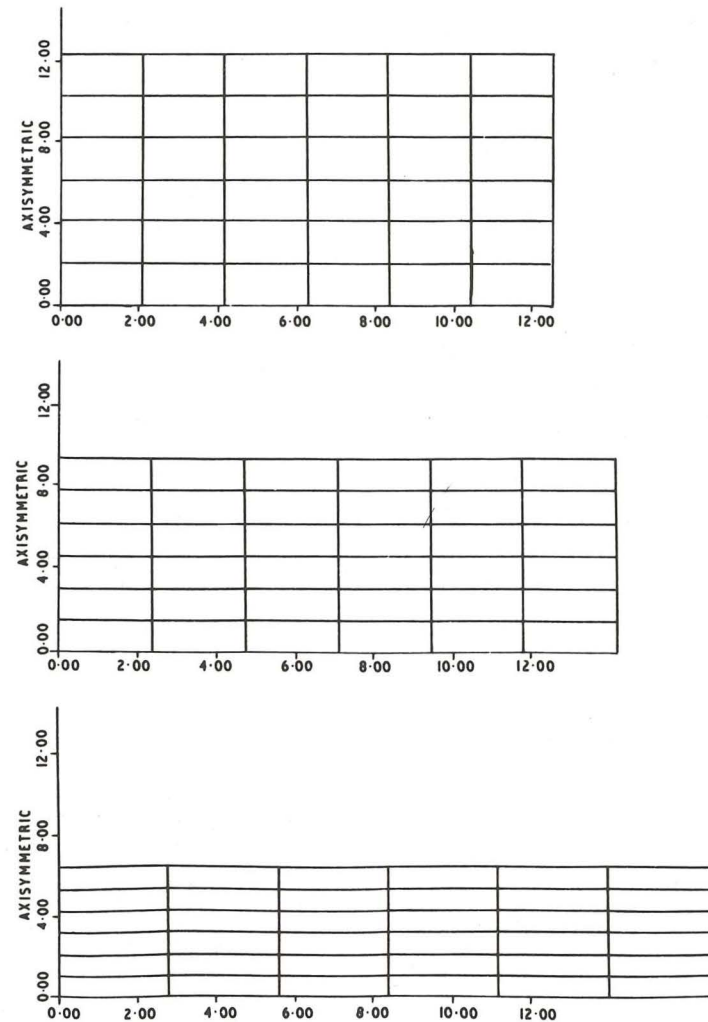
Compression of a cylinder without friction, one quadrant shown. Initial dimensions 25 mm high, 25 mm dia.
